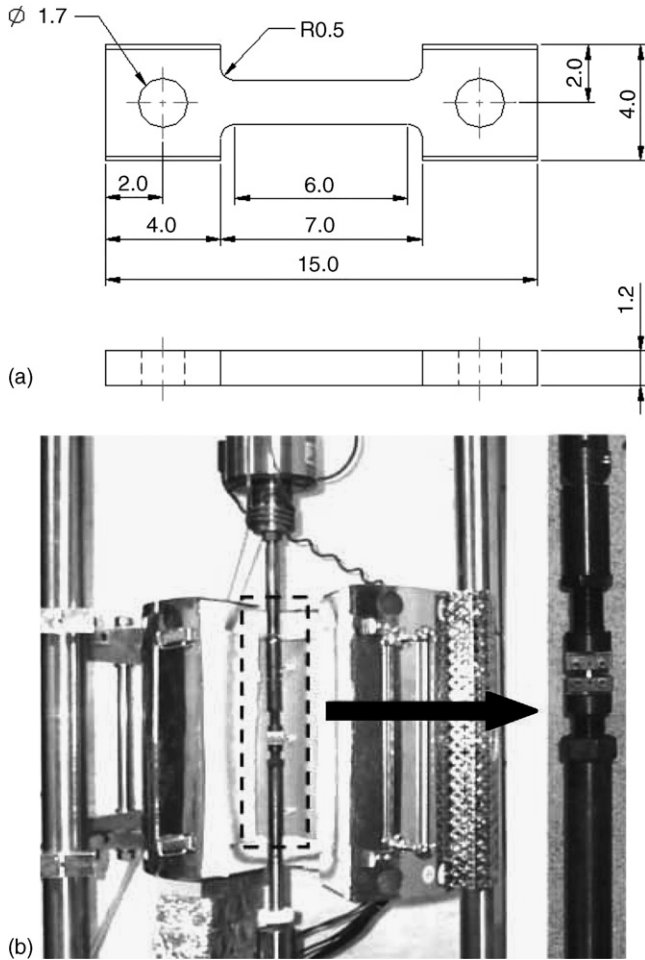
(a) Shape and dimensions of the tensile specimen and (b) appearance of fixtures with specimen installed within the electric furnace.
